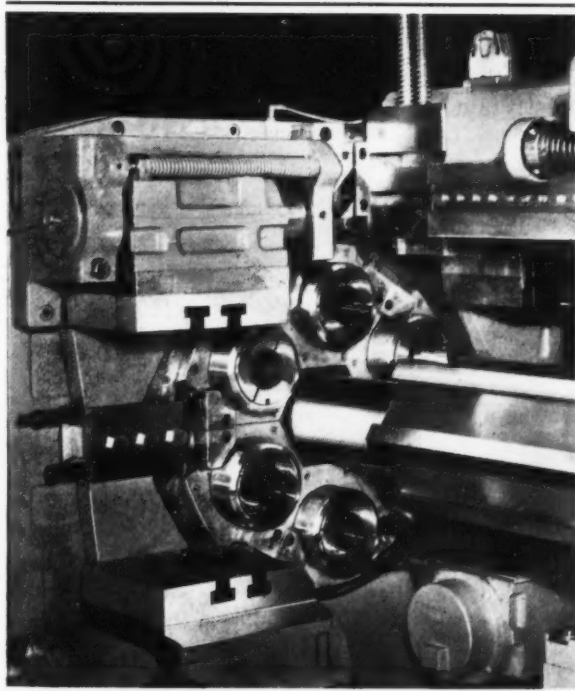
Close-up View of the Spindle Carrier of a Six-spindle Machine and of the Carrier Stem and Tool-slides
